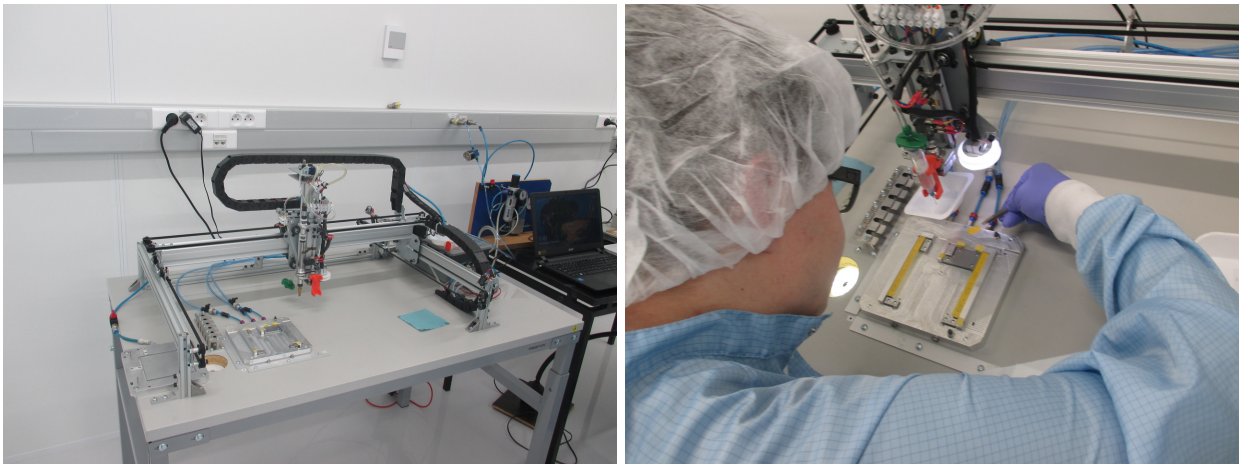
Left: gluing robot developed at the IIHE. Right: first trial assembly using the kapton gluing precision jig.
